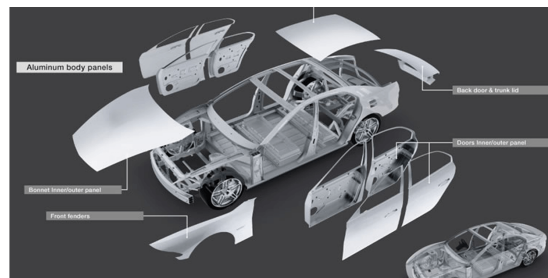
Automotive body parts fabricated from Aluminum alloy composite materials
